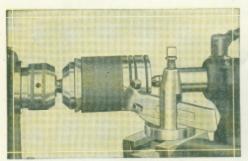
Turning a Semi-machined Piston Mounted on a No. 44 Piston Adapter. See Page 27.
